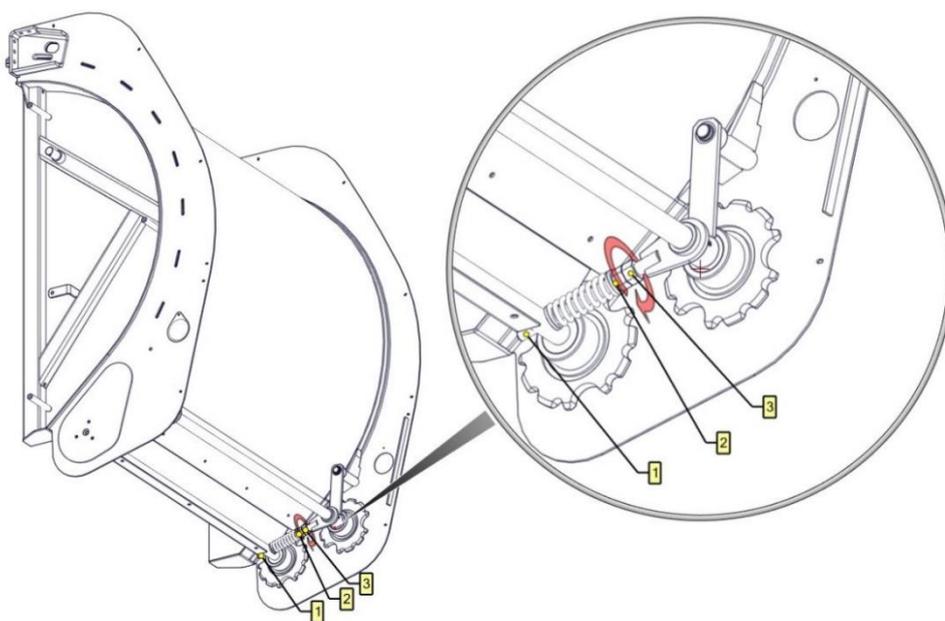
Adjusting the tension of the chain and rod conveyor set of the Z587/1 baler
